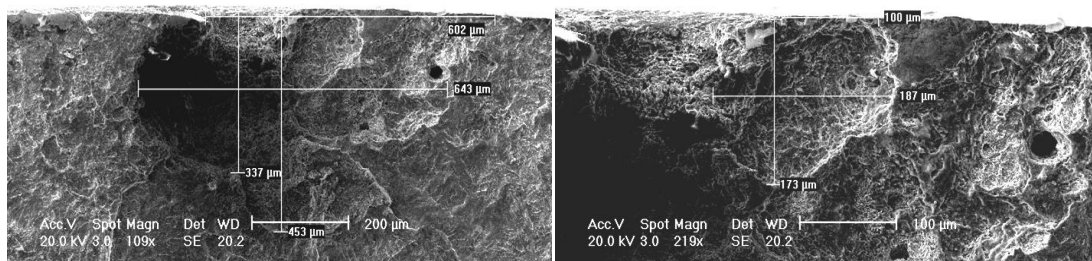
Larger scale fatigue specimen 1 - Dimension of the corrosion flaw in the fracture surface plan (left) and the subsurface flaw (right)
